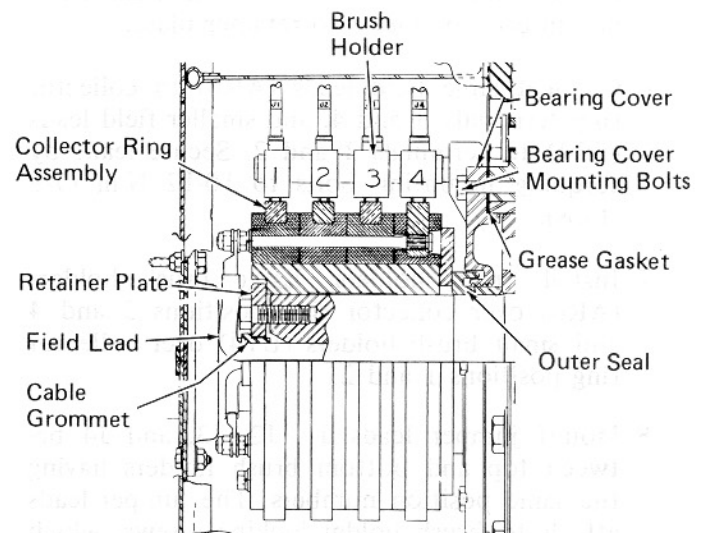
Assembly Of Generator After Bearing Maintenance
